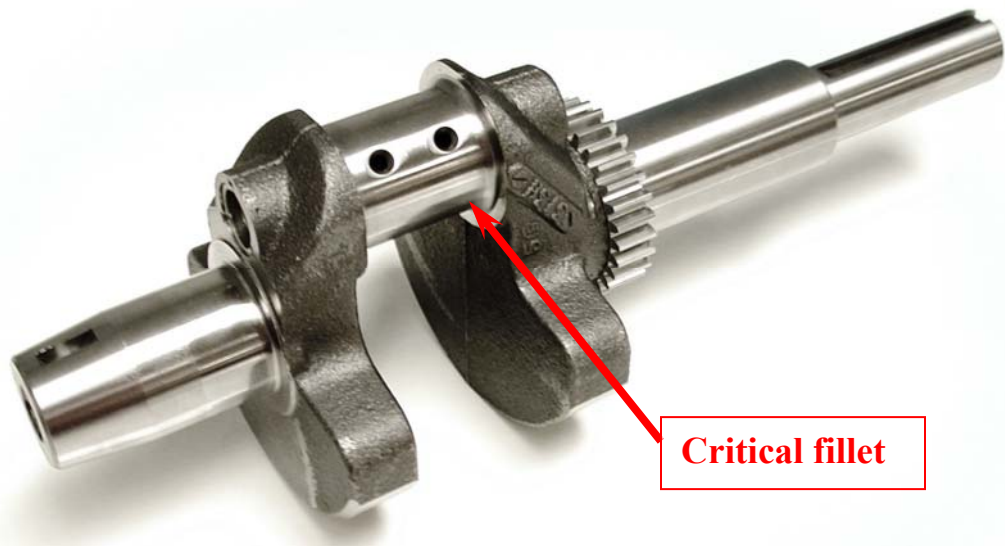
Ductile cast iron crankshaft in its final machined condition.
